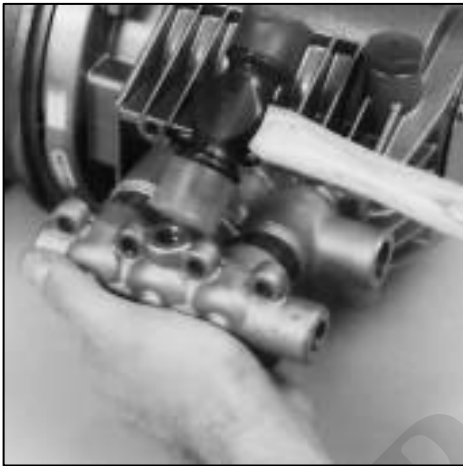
Inlet Valve kit for 2SFX pumps (IPF CT34668)
